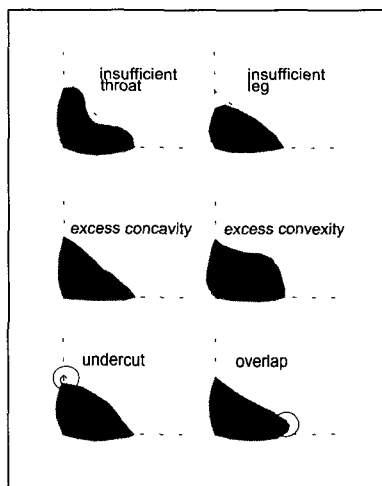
Definition of various weld defects in horizontal fillet welding
